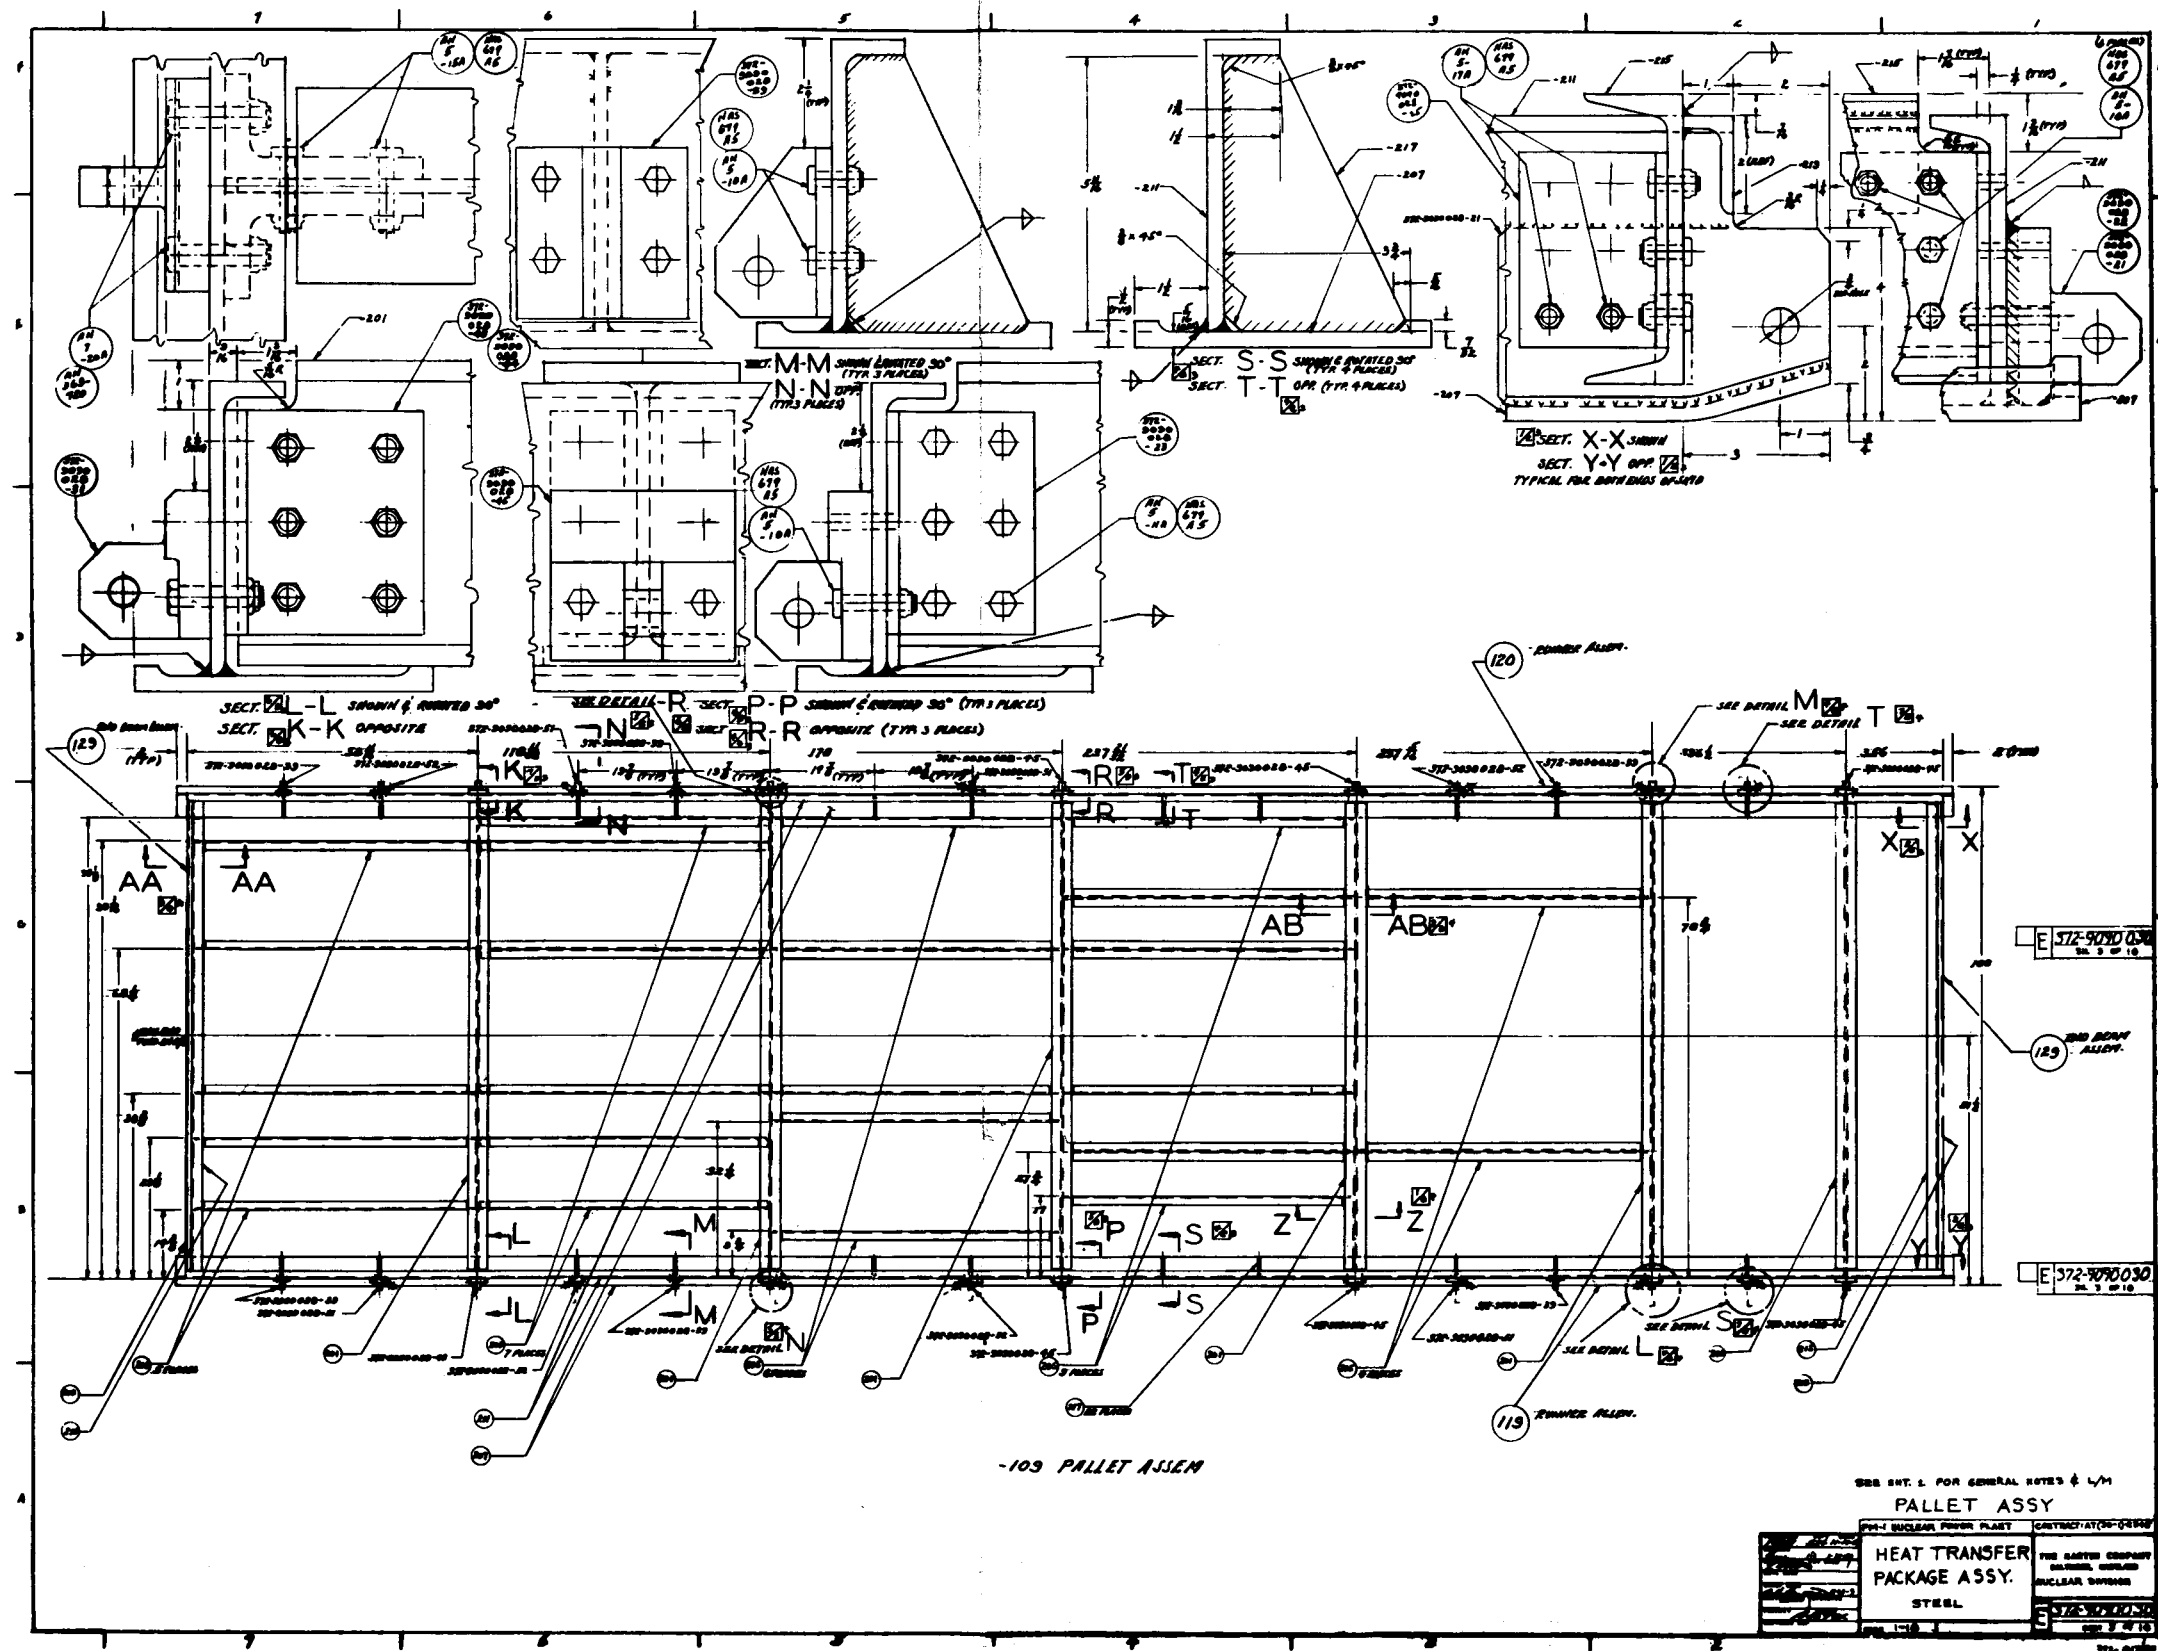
Heat Transfer Package Assembly Drawing (Pallet Assembly)
